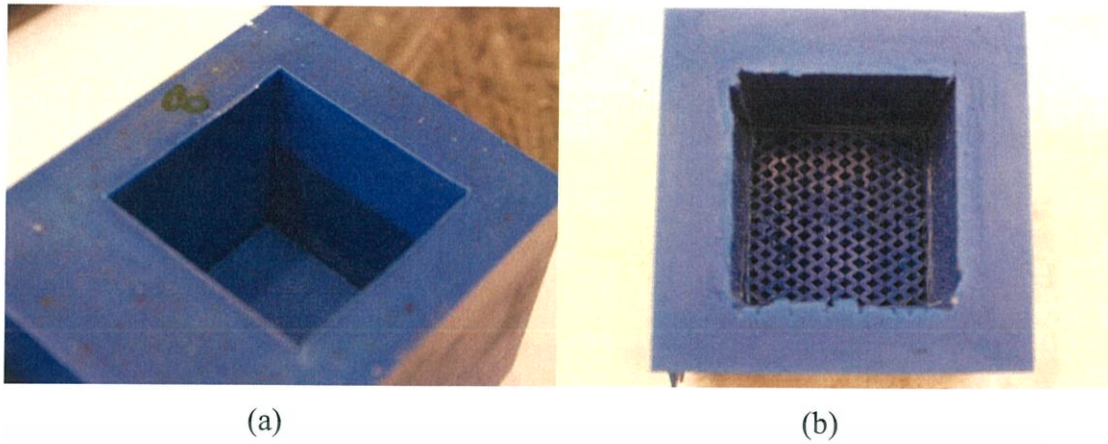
Wax mold: (a) smooth and (b) rough surface
